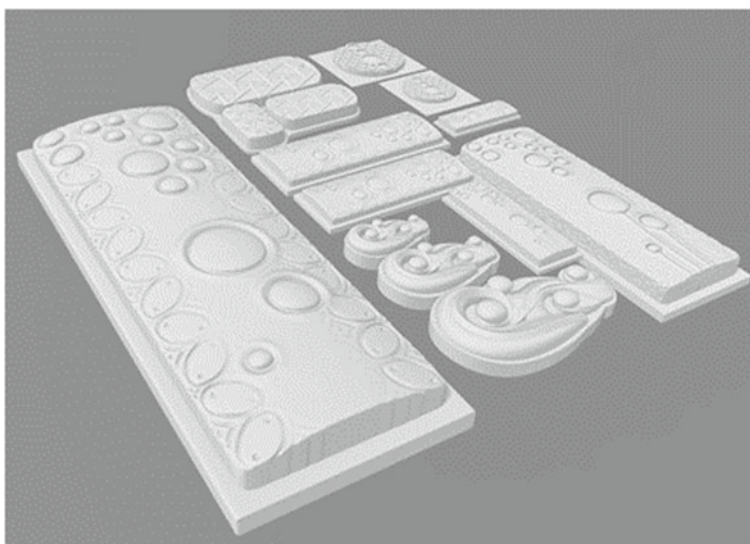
3D CAD master pattern of jewelry ceramic molds
